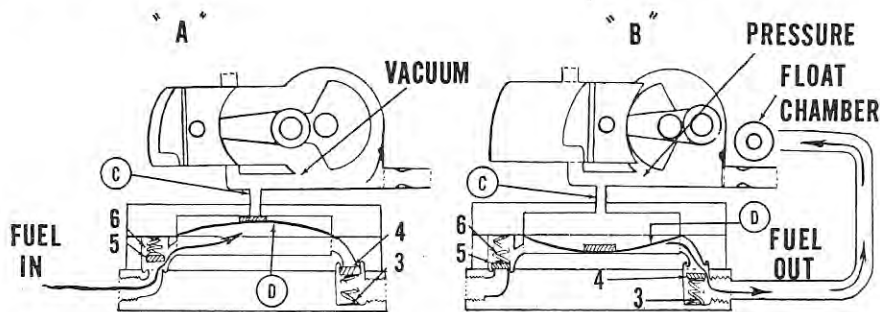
Schematic view showing operation of the crankcase operated, diaphragm fuel pump. Pressure and vacuum pulsations from crankcase pass through connection (C) to rear of diaphragm (D) which induces pumping action on fuel line as shown.
